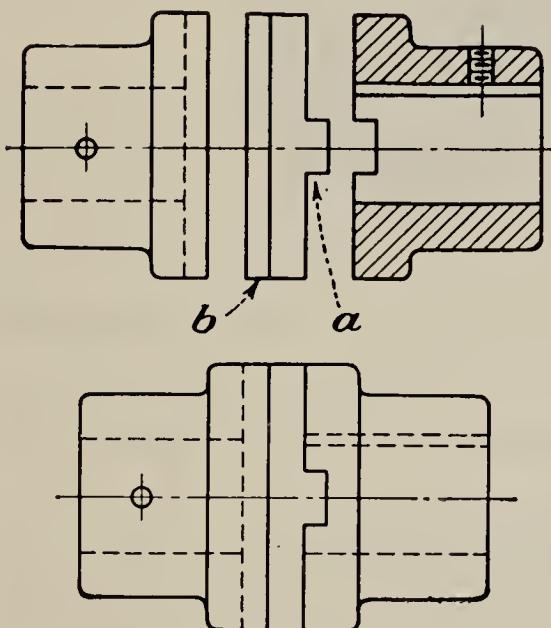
Oldham coupling. Upper view shows parts; lower view shows assembly.
